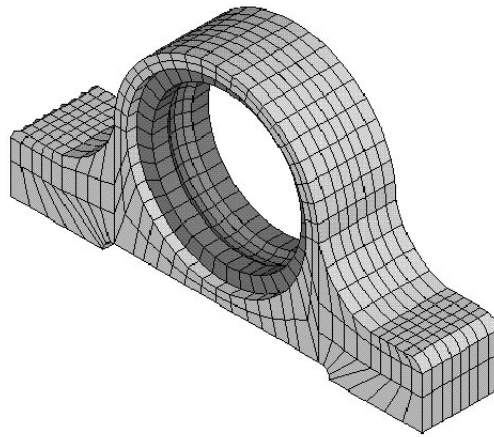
FEM model of an aluminium bearing housing containing an outer ring of a deep groove ball bearing.
